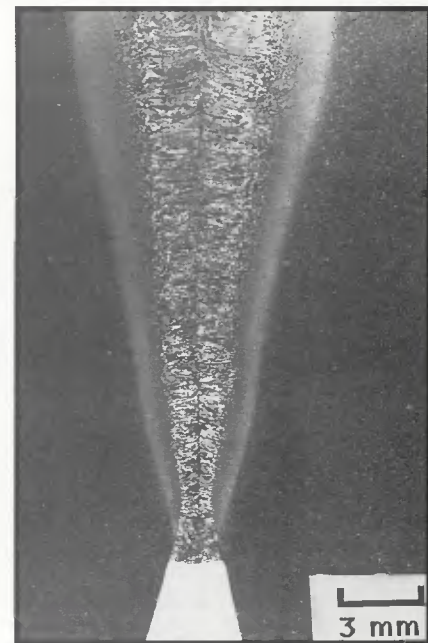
Weld bead profile for a root pass in a double V-groove on 26-mm plate using a hot welding wire addition with a feed rate of 425 mm/s.
